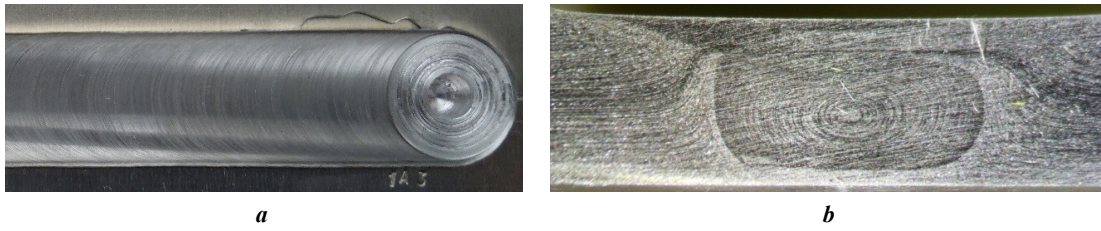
Appearance (a) and macrosection (b) of the cross section of the welded joint produced by a tool with a conical pin shape (Fig. 1 b).
